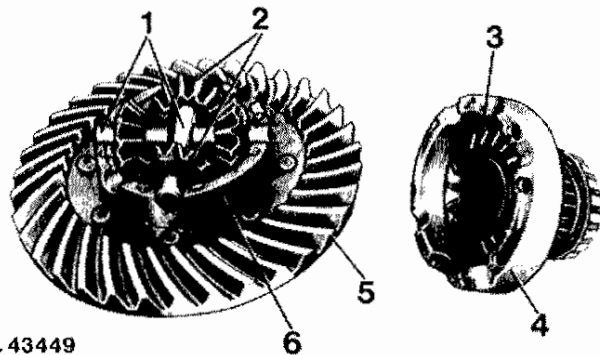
Removing Bevel Gears and Bevel Pinions.
